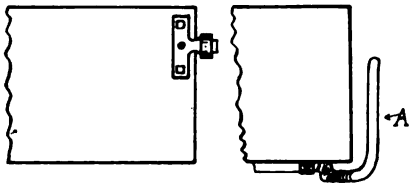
BOTTOM PLAN OF END GATE FASTENER.
